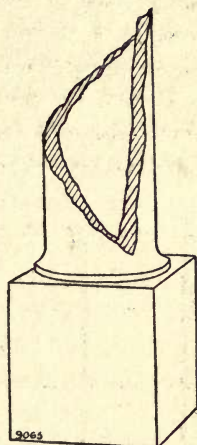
Fracture of Cast - Iron Hollow Specimen in Torsion.
